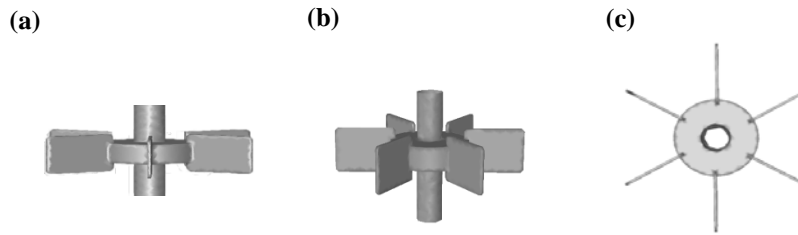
Rushton turbine; (a) Front view, (b) Diagonal view, (c) Cross section.
